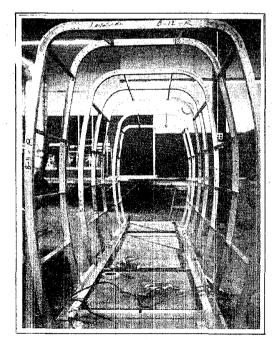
Completed Superstructure Frame with Fixture Removed
